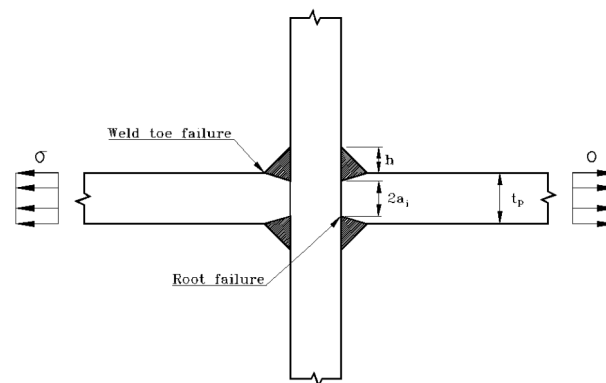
Cross-section of a structural joint welded using partial penetration welds, indicating locations of weld root and toe [20].
